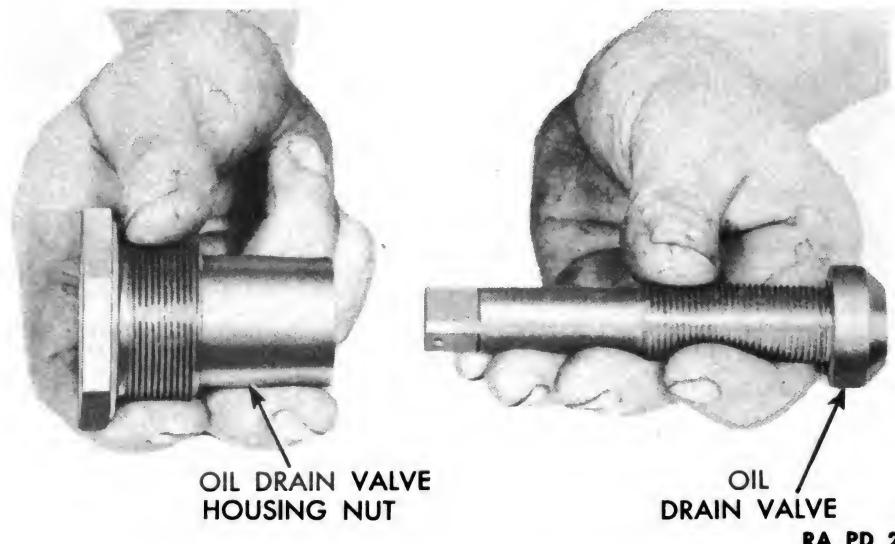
Removing Oil Drain Valve Housing Nut From Valve
